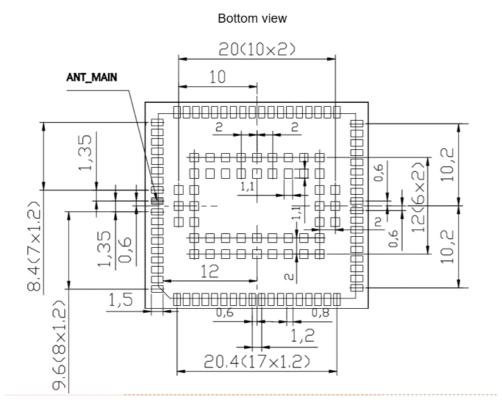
Dimensions of ELS62 (all dimensions in mm)
